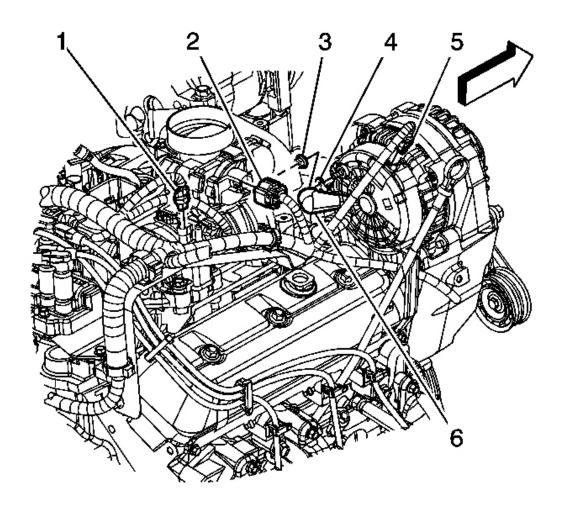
View Of Engine Wiring Harness & Components Courtesy of GENERAL MOTORS CORP.
